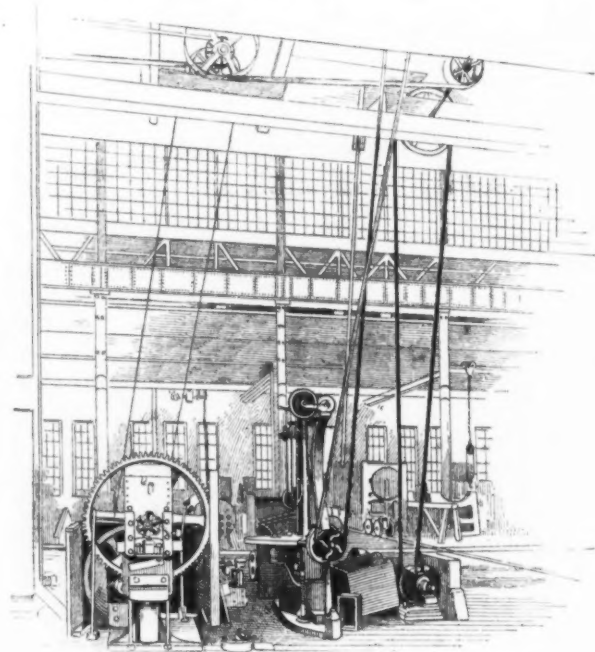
Electric Motor Driving Shear and Upright Drill.
